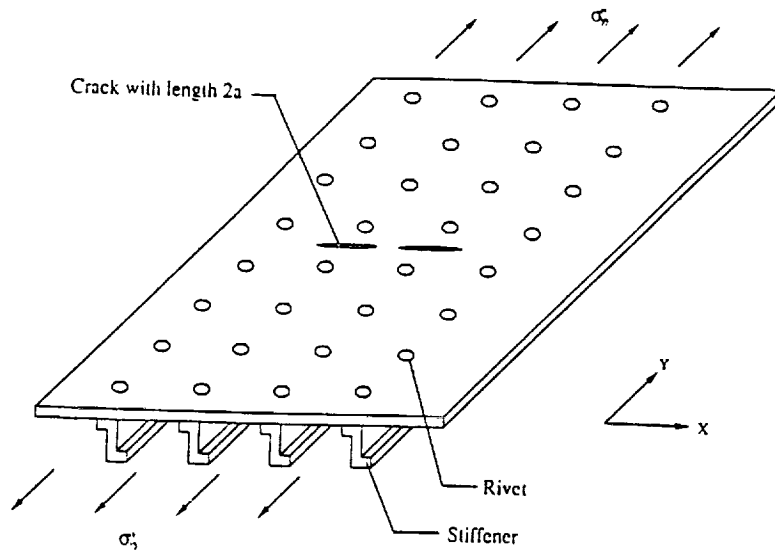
STIFFENED PANEL WITH TWO CRACKS
